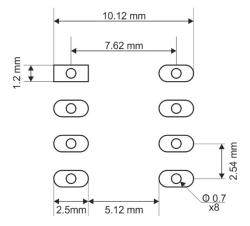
Recommended solder pad layout. Dimensions are inclusive of plating.
